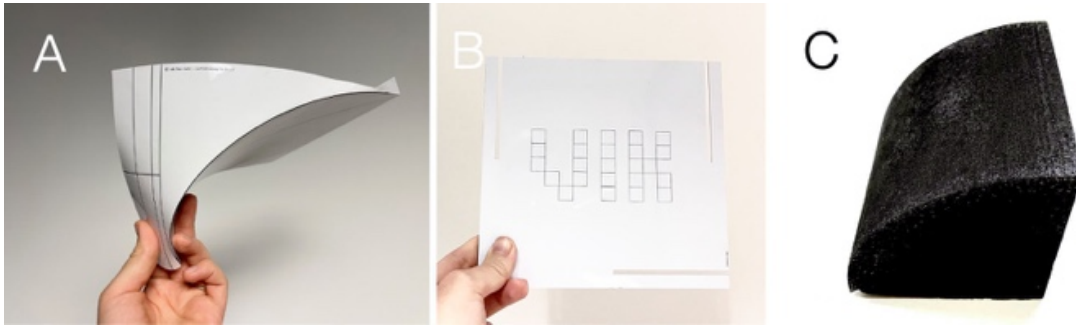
A) A curved-crease folded flex PCB molding insert. B) One side of the rigid PCB molding base. C) A resultant soft-foam curved block.
